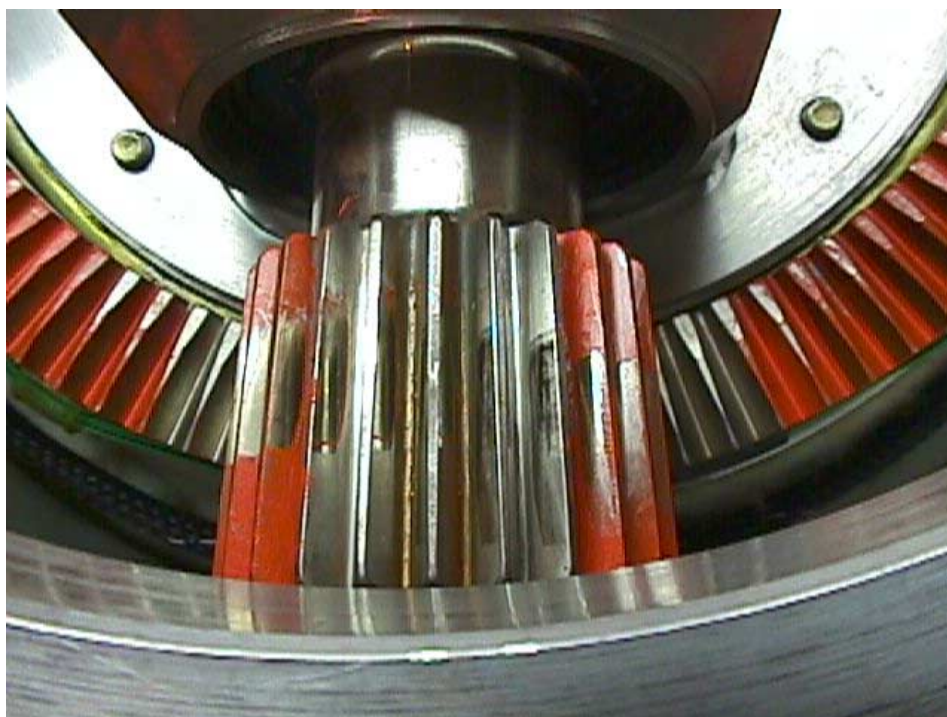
Idler 4 Contact Patterns with Upper and Lower Face Gears
